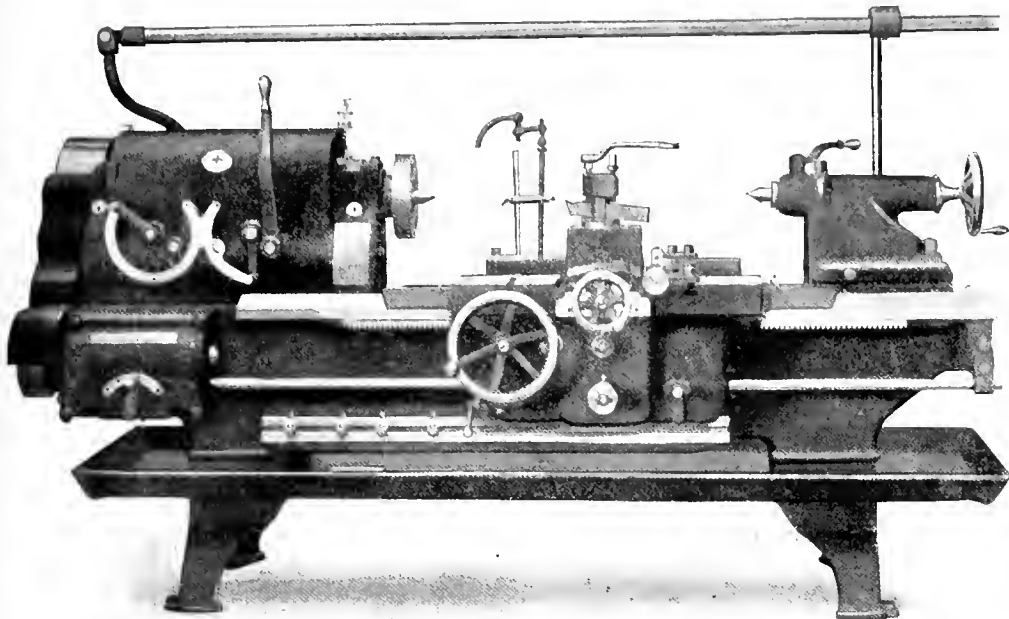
The LeBlond Heavy Duty Lathe, with Geared Head and Multiple Cross and Longitudinal Stops
